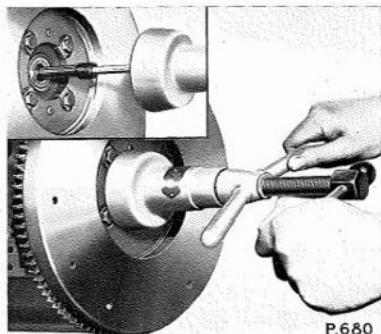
Removing the stem wheel spigot bearing from the crankshaft, with the flywheel in position, using the Churchill Tool 7600, and the adaptor set R.G. 7600-1.
